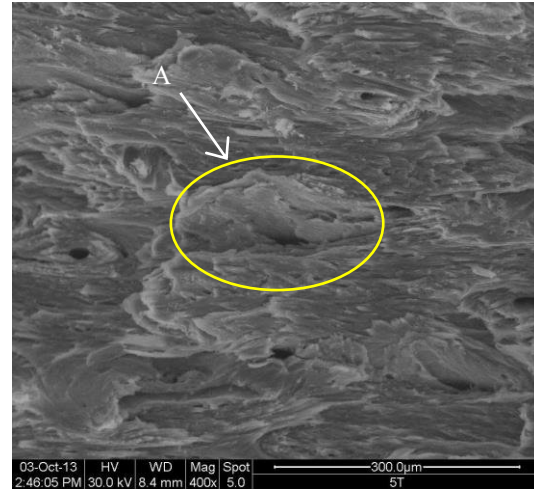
Microphotography of the fracture surface - detail A highlights shear and peel effects.
